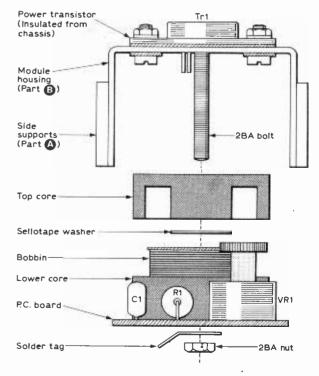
An exploded diagram of the oscillator transformer and mounting.
